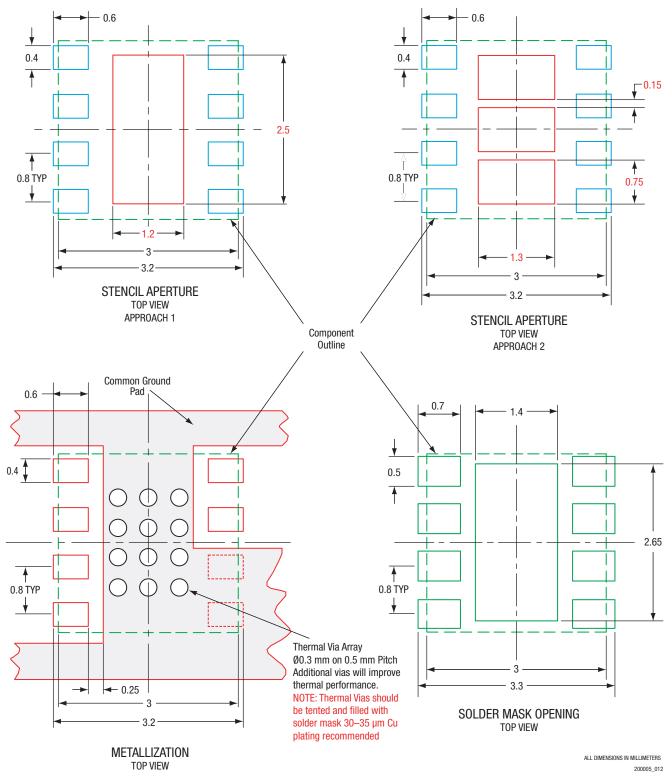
Phone PCB Layout Footprint for 3 x 3 mm, 8-Pad Package – SKY77162
